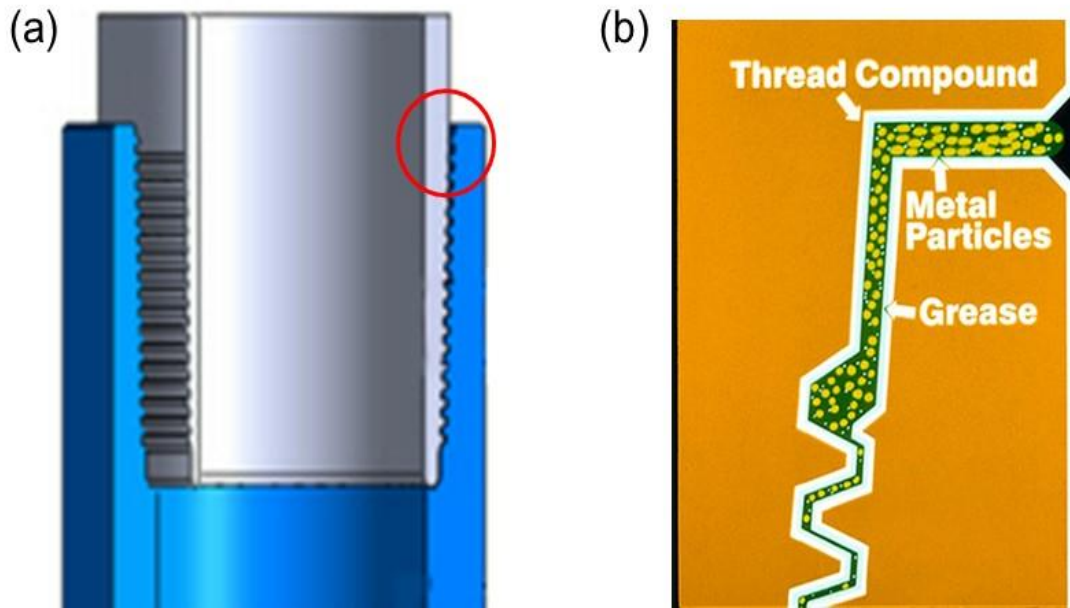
(a) Cross sectional view of a typical threaded connection for tubing and casing joints; and (b) Close up view of the mating threads coated in thread compound.
